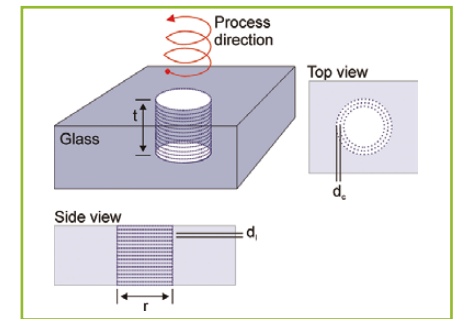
, Schematic of laser drilling of a cylindrical hole with radius r by three dimensional lining-up of single dots
